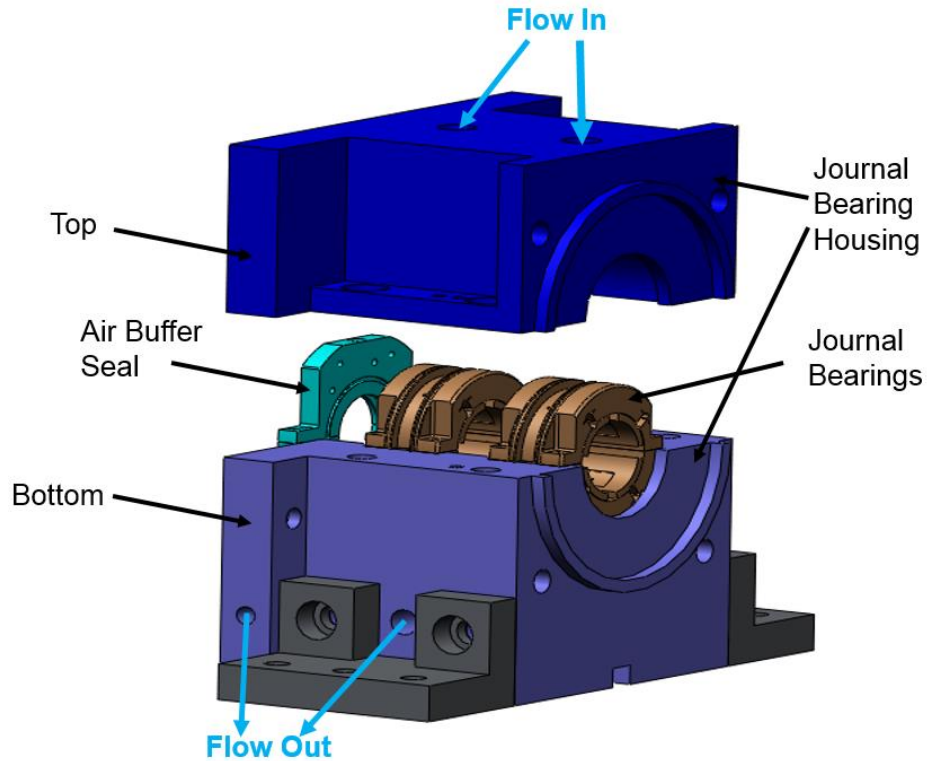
Exploded view of journal bearing housing with journal bearings and air buffer seal included.
